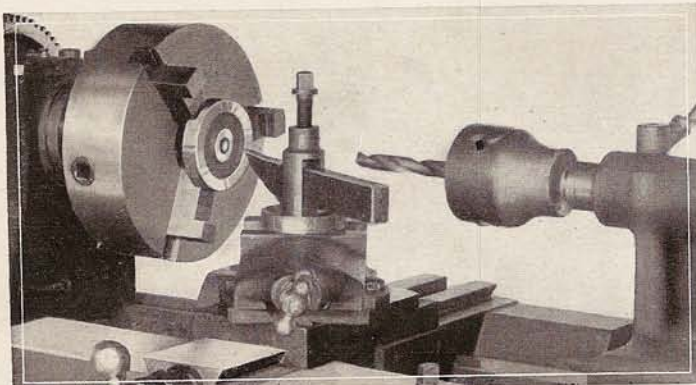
Drilling and Facing a Cast Iron Gear Blank Held in a Lathe Chuck. Drill Chuck Mounted in the Tail Spindle
